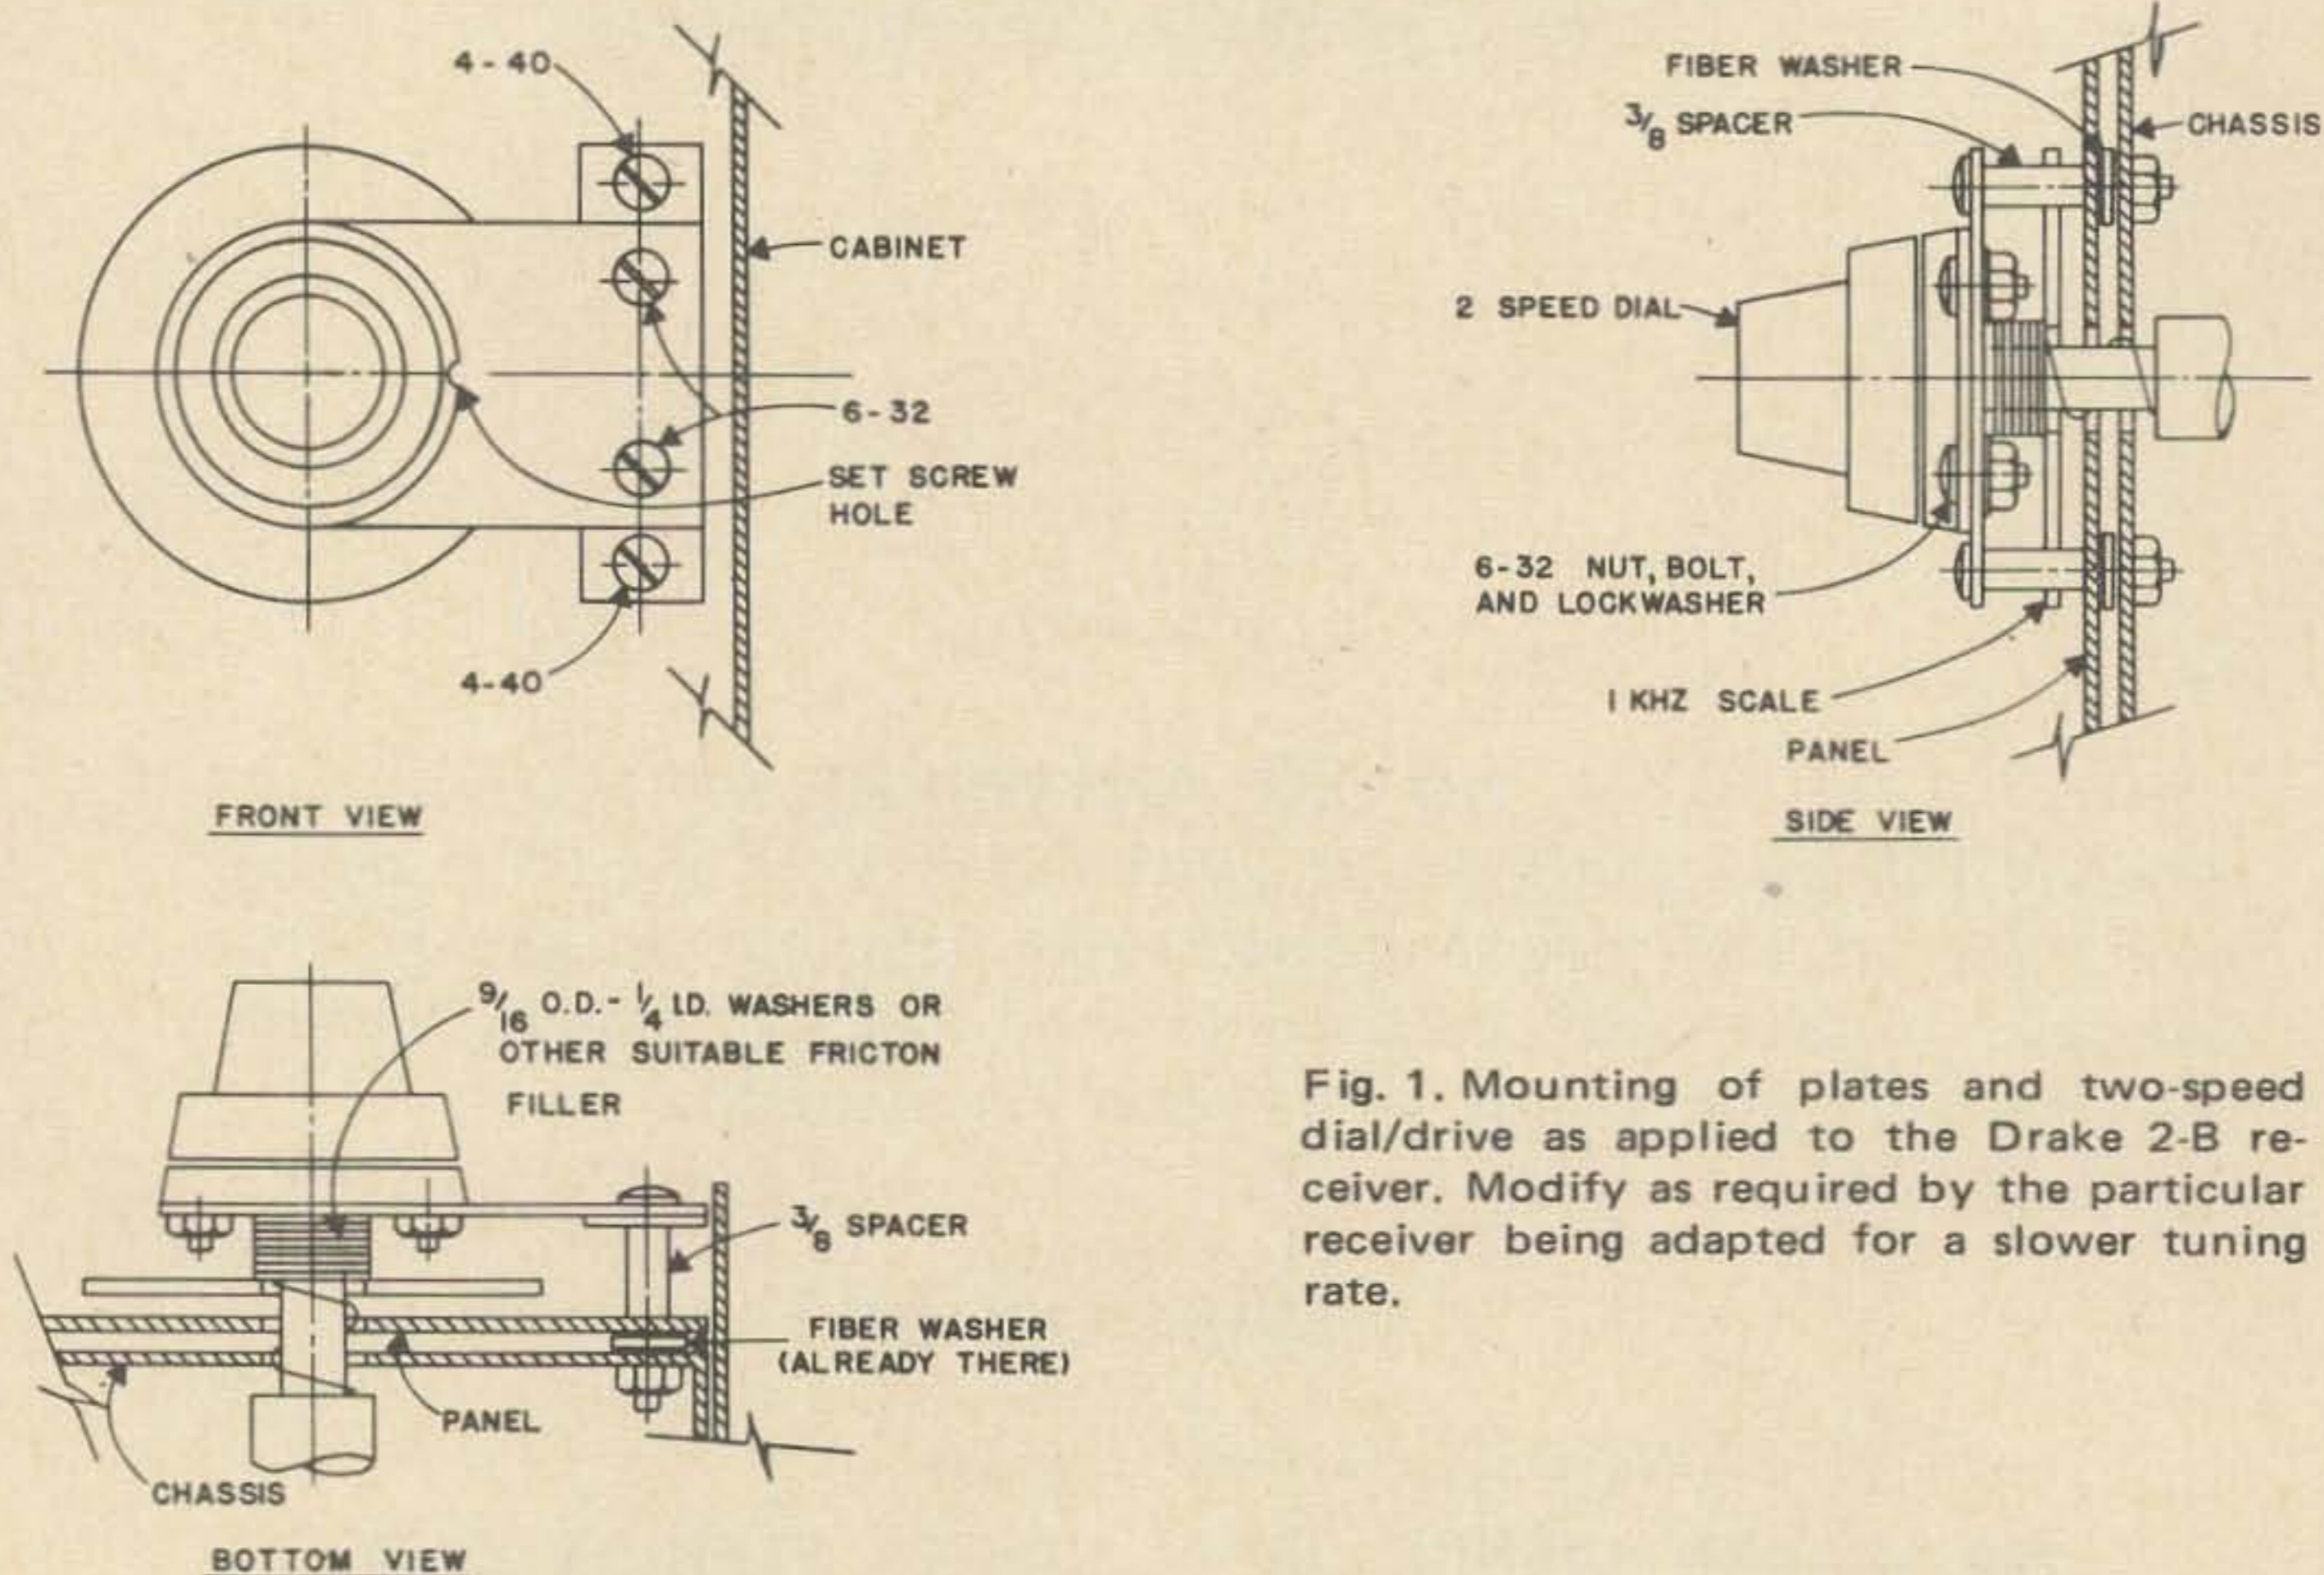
Mounting of plates and two-speed dial/drive as applied to the Drake 2-B receiver. Modify as required by the particular receiver being adapted for a slower tuning rate.
